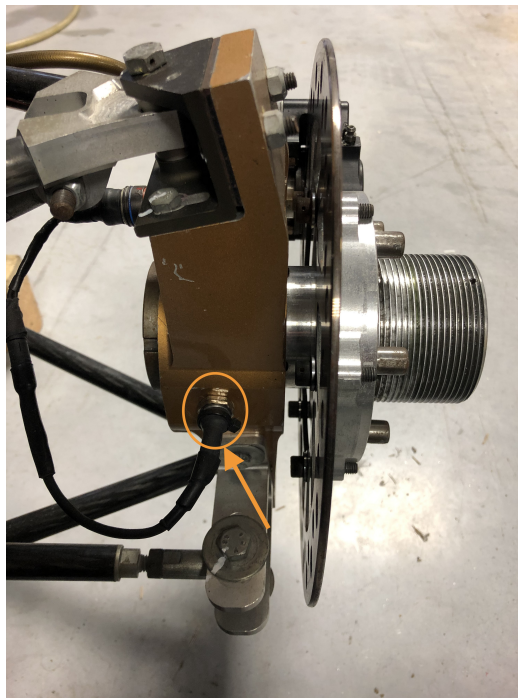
Wheel upright and hub assembly with integrated angular velocity sensor.
